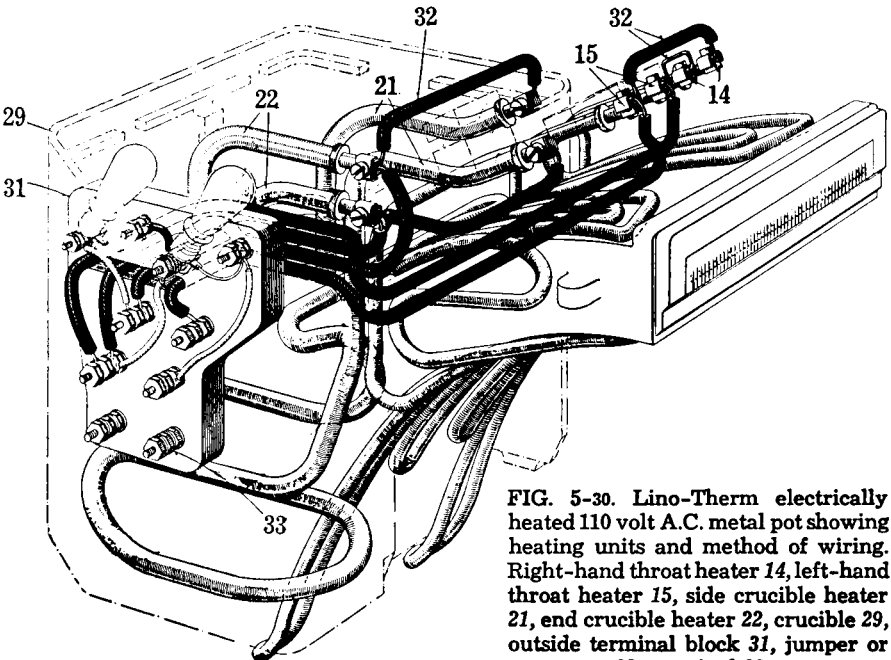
Lino-Therm electrically heated 110 volt A.C. metal pot showing heating units and method of wiring. Right-hand throat heater 14, left-hand throat heater 15, side crucible heater 21, end crucible heater 22, crucible 29, outside terminal block 31, jumper or connector 32, terminal 33.
